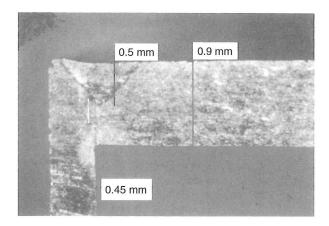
A3003 butt weld cross-section. TruPulse 304, Peak power 5 kw. Welding speed 13.3 mm/s (0.8 m/min).
